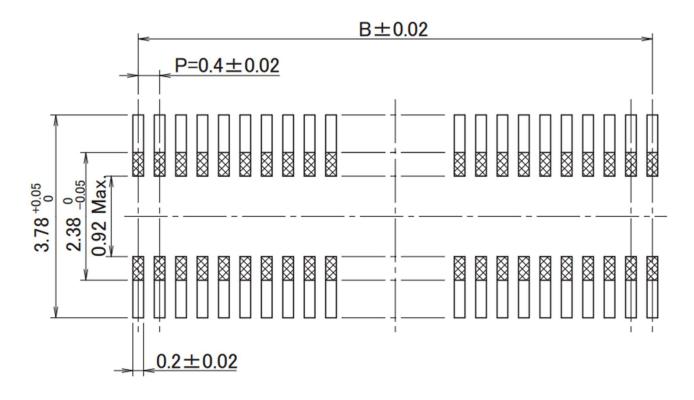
MM70-314B1-2-R300 Recommended PCB Footprint
